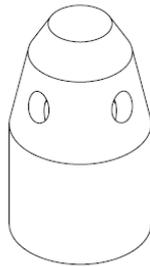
Poppet of the Check Valve with a circular holes on surface
